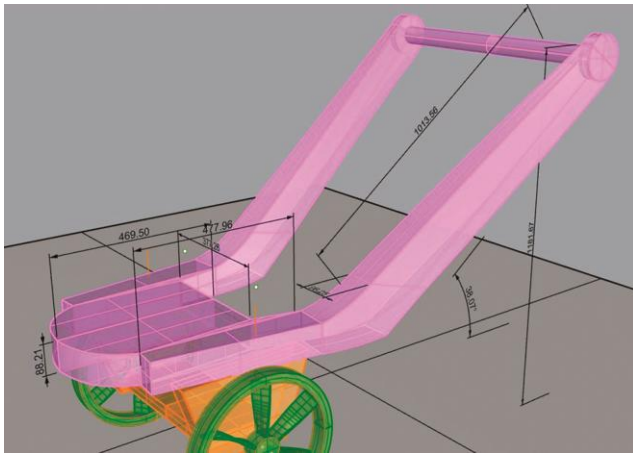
Perspective view of the front part of the cart with dimensions cart.
